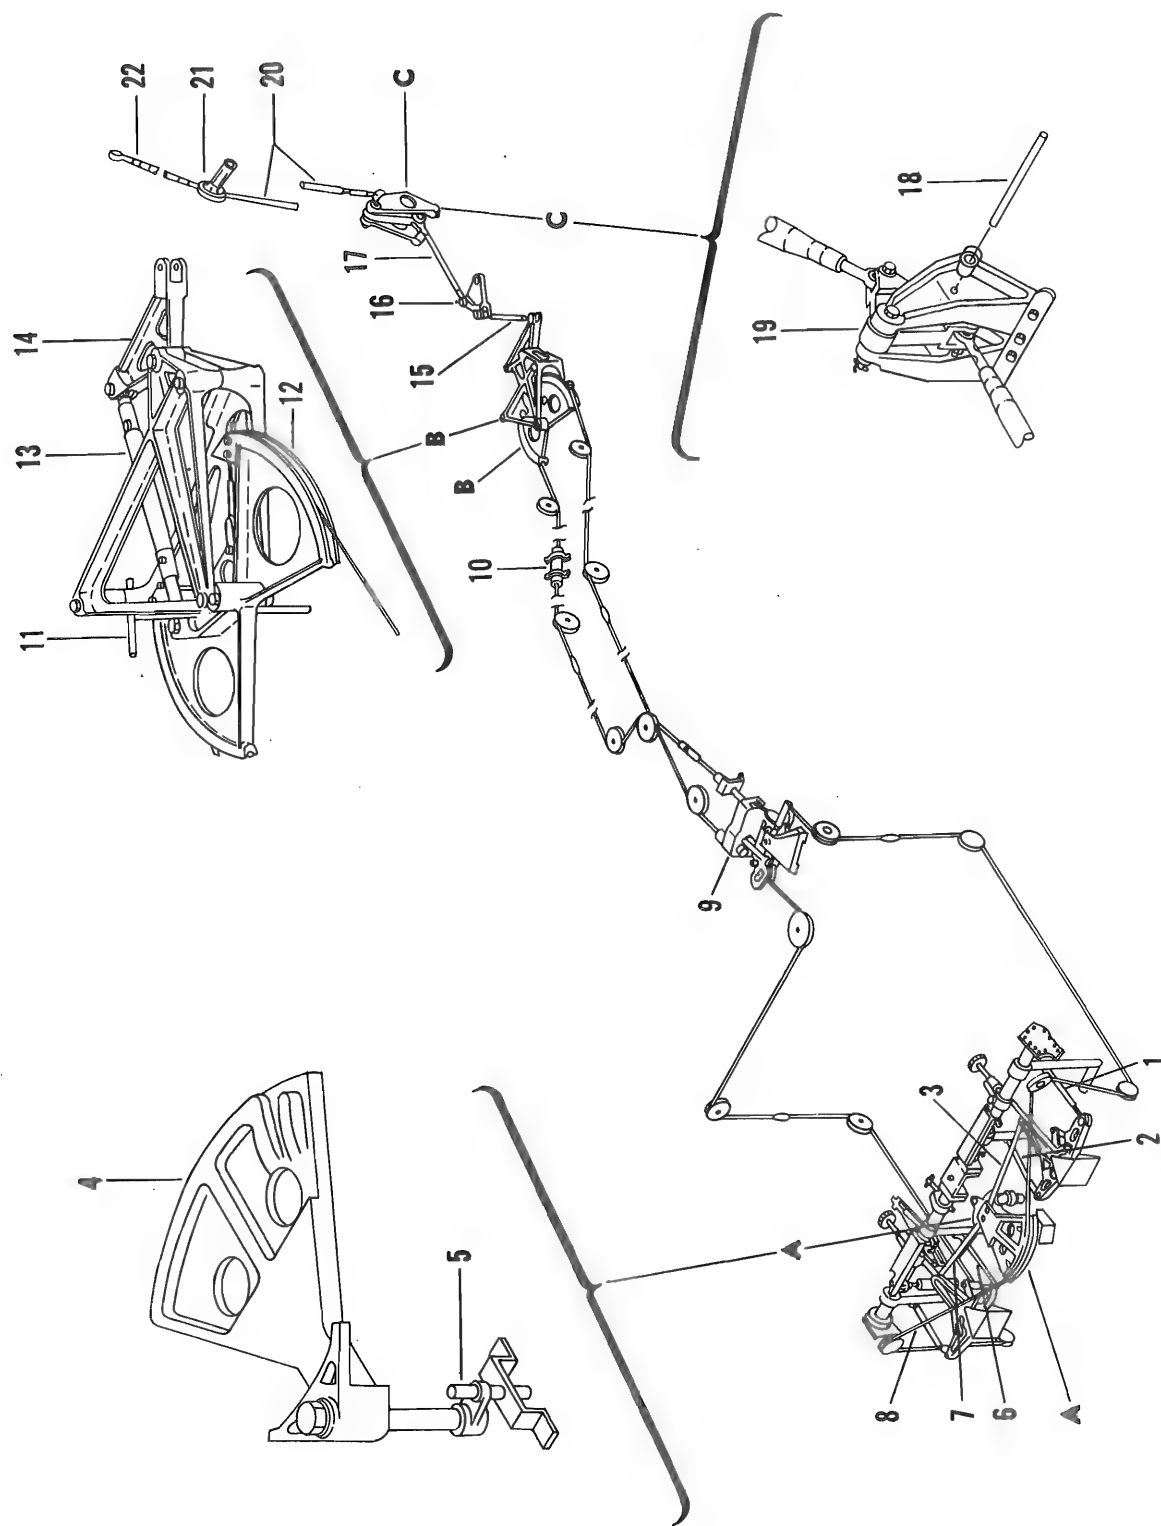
Tail Rotor Rigging (Sheet 2 of 2)
